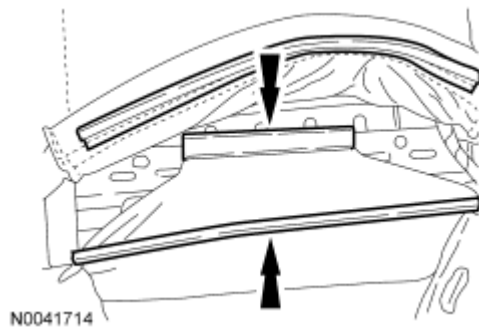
Locating Outer And Inner Backrest Trim Cover Lower J-Clips
